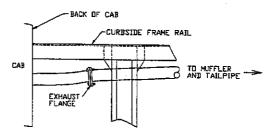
EXHAUST FLANGE DISCONNECT
